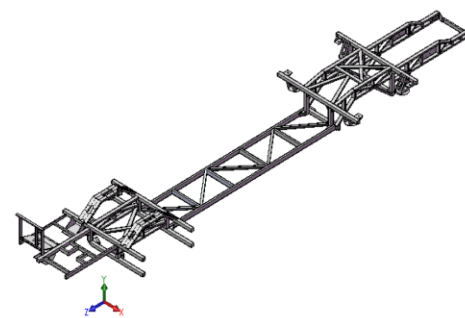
Chassis platform of 6-wheel Single Decker bus configuration; SD model
